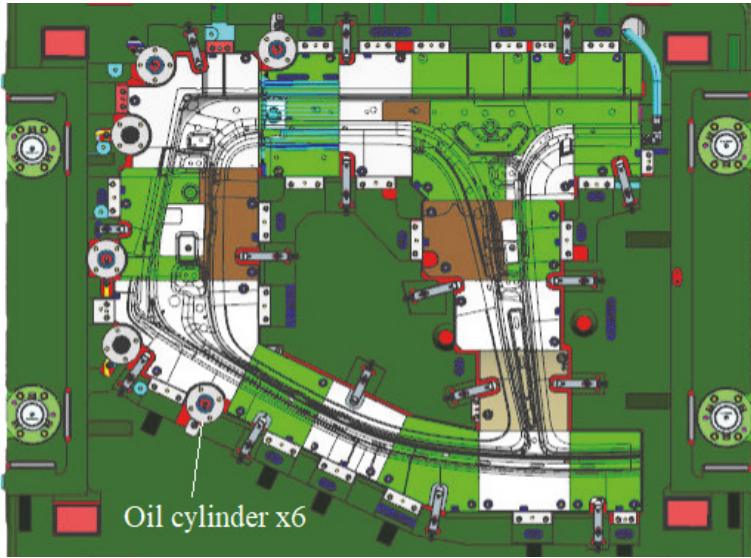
The lower mold uses 6 sets of in-mold cylinders to PAD the top mold.
